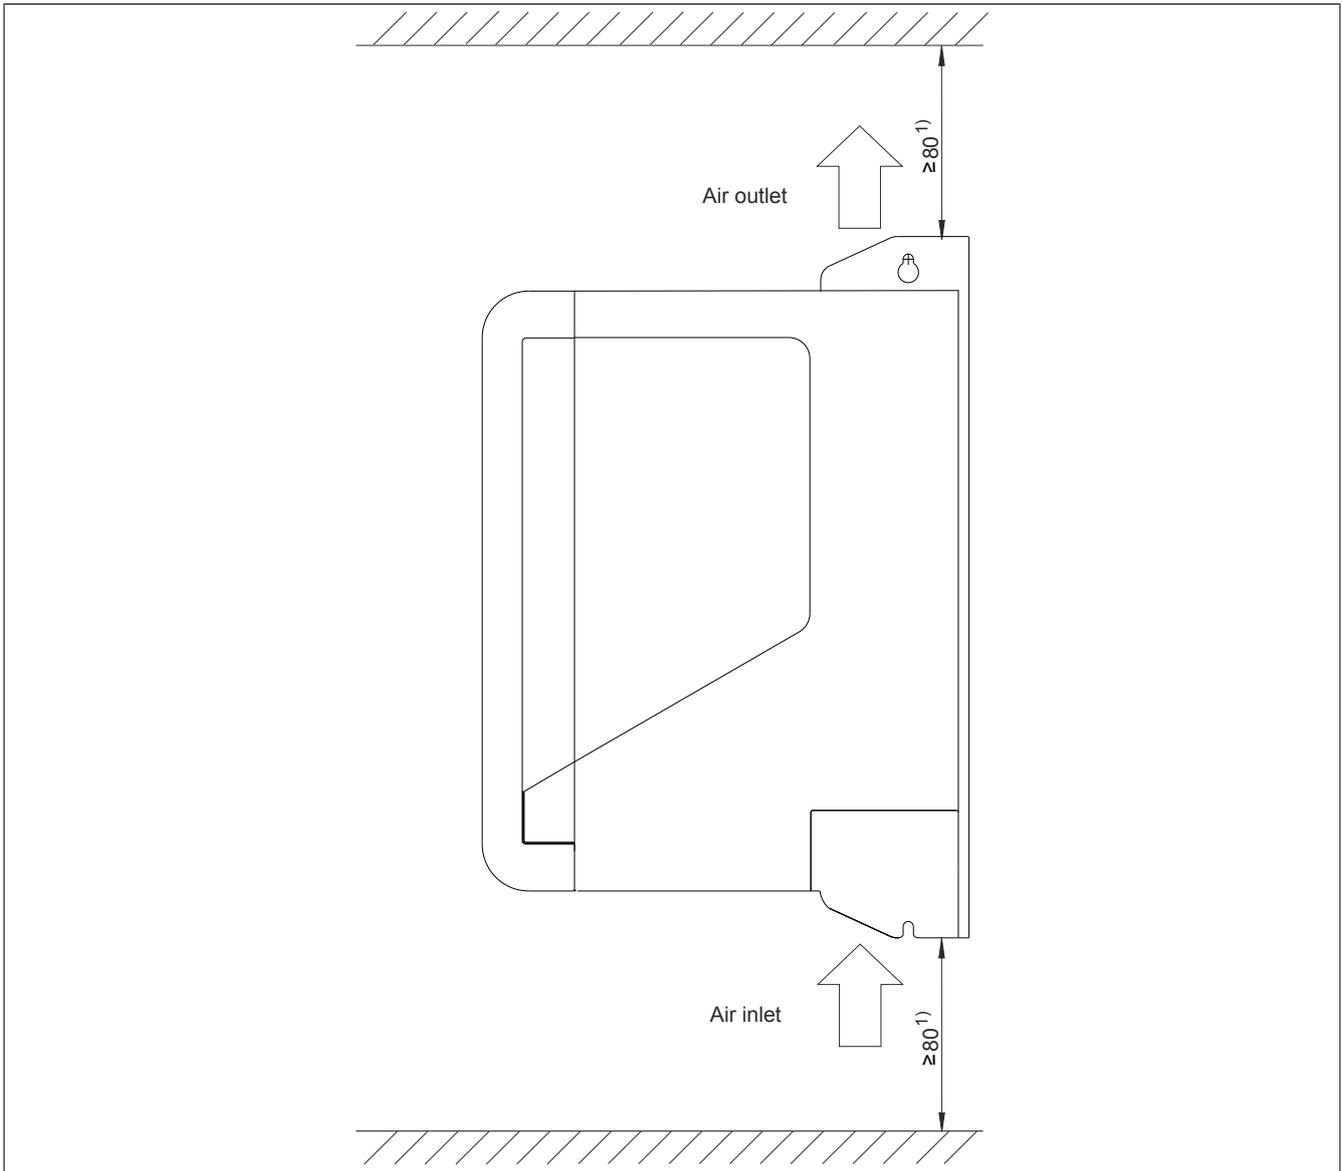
ACOPOS P3 8EI servo drives - Installation dimensions
